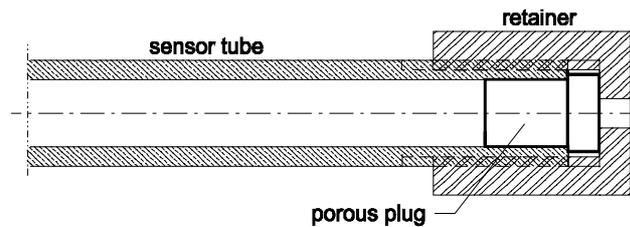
Retaining sleeve and cork plug at the end of the sensor tube.
